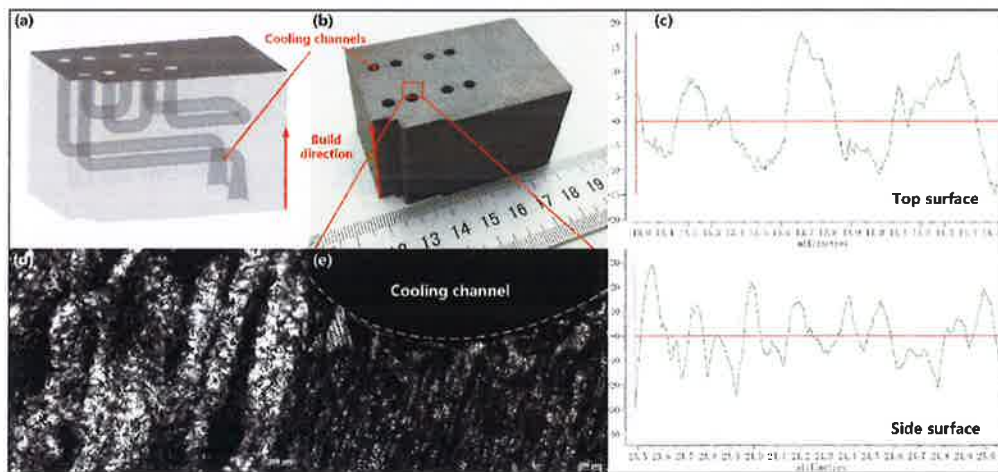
SLM-manufactured mold with cooling channels: (a) CAD framework; (b) as-fabricated component; (c) surface roughness; and (d-e) top surface morphology.
